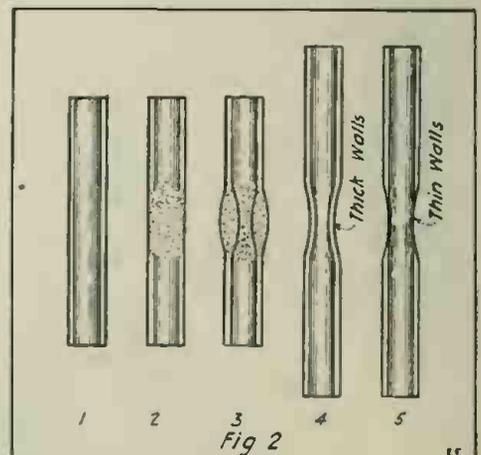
Successive Operations to be Carried Out in Heating a Glass Tube for the Purpose of Forming a Constriction.
